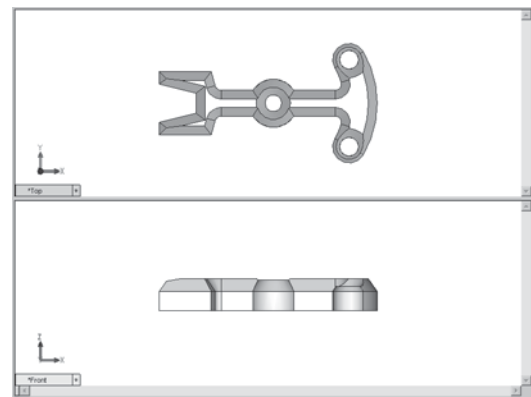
Drawing area divided in two rows horizontally using the Two View - Horizontal tool
